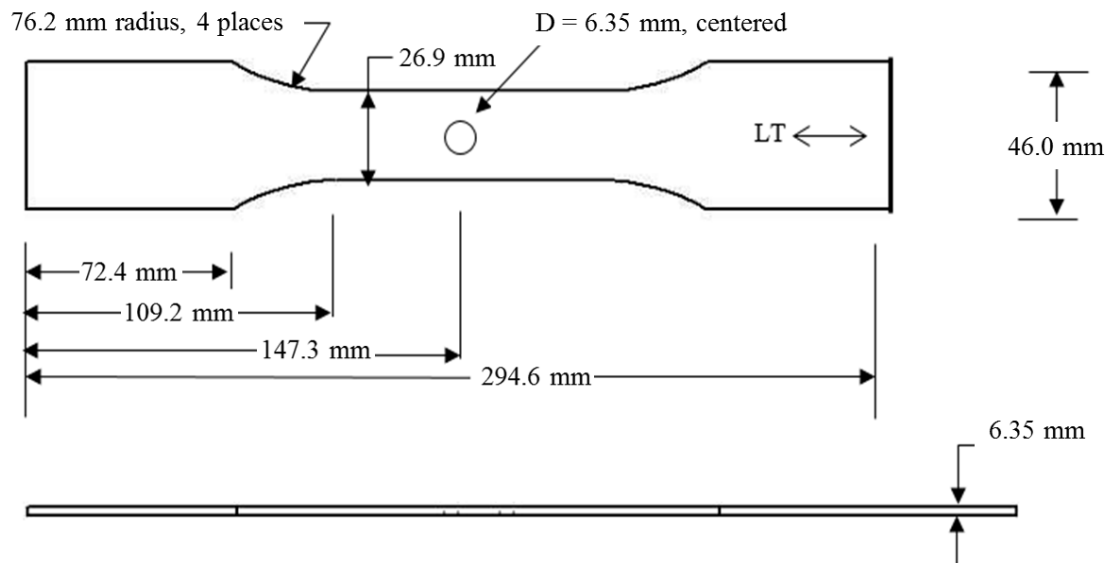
Open-hole specimen geometry for both the as-drilled and cold-expanded holes. Half of the specimens received 4.2% cold expansion using a split mandrel. All specimens were then reamed to a final diameter of 6.35 mm.
